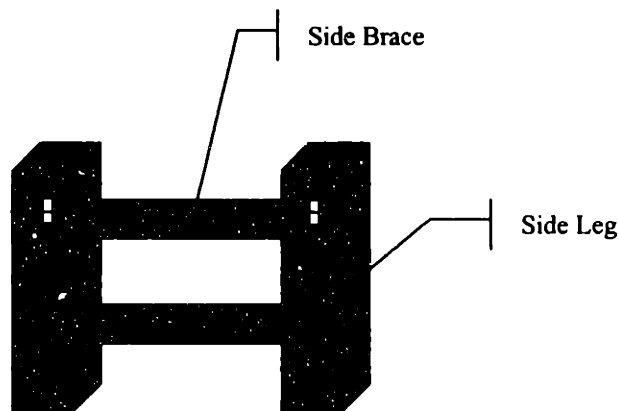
Typical 9100/1201 Leg Pair Weldment
